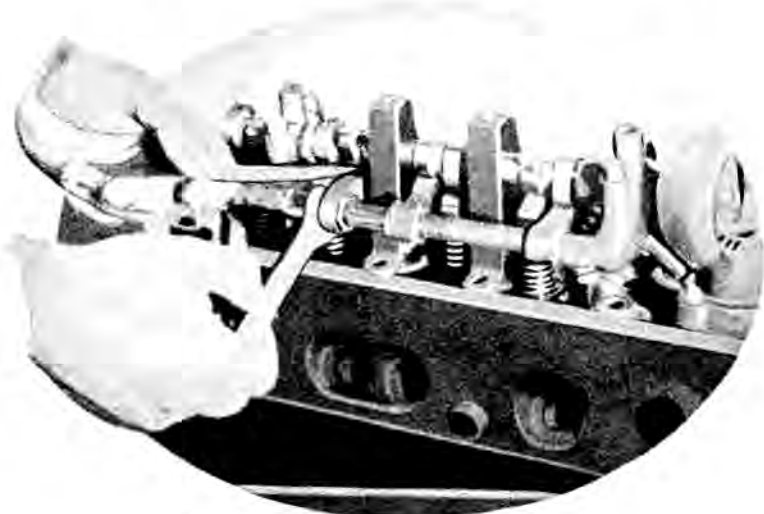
ADJUSTING THE VALVE CLEARANCE
